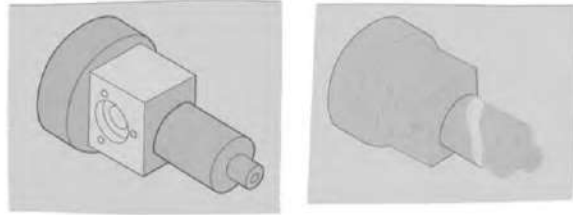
The types of machining that can be done using a CNC turnmill centre with Y-axis (Courtesy, Yamazaki mazak Corp., Japan)
